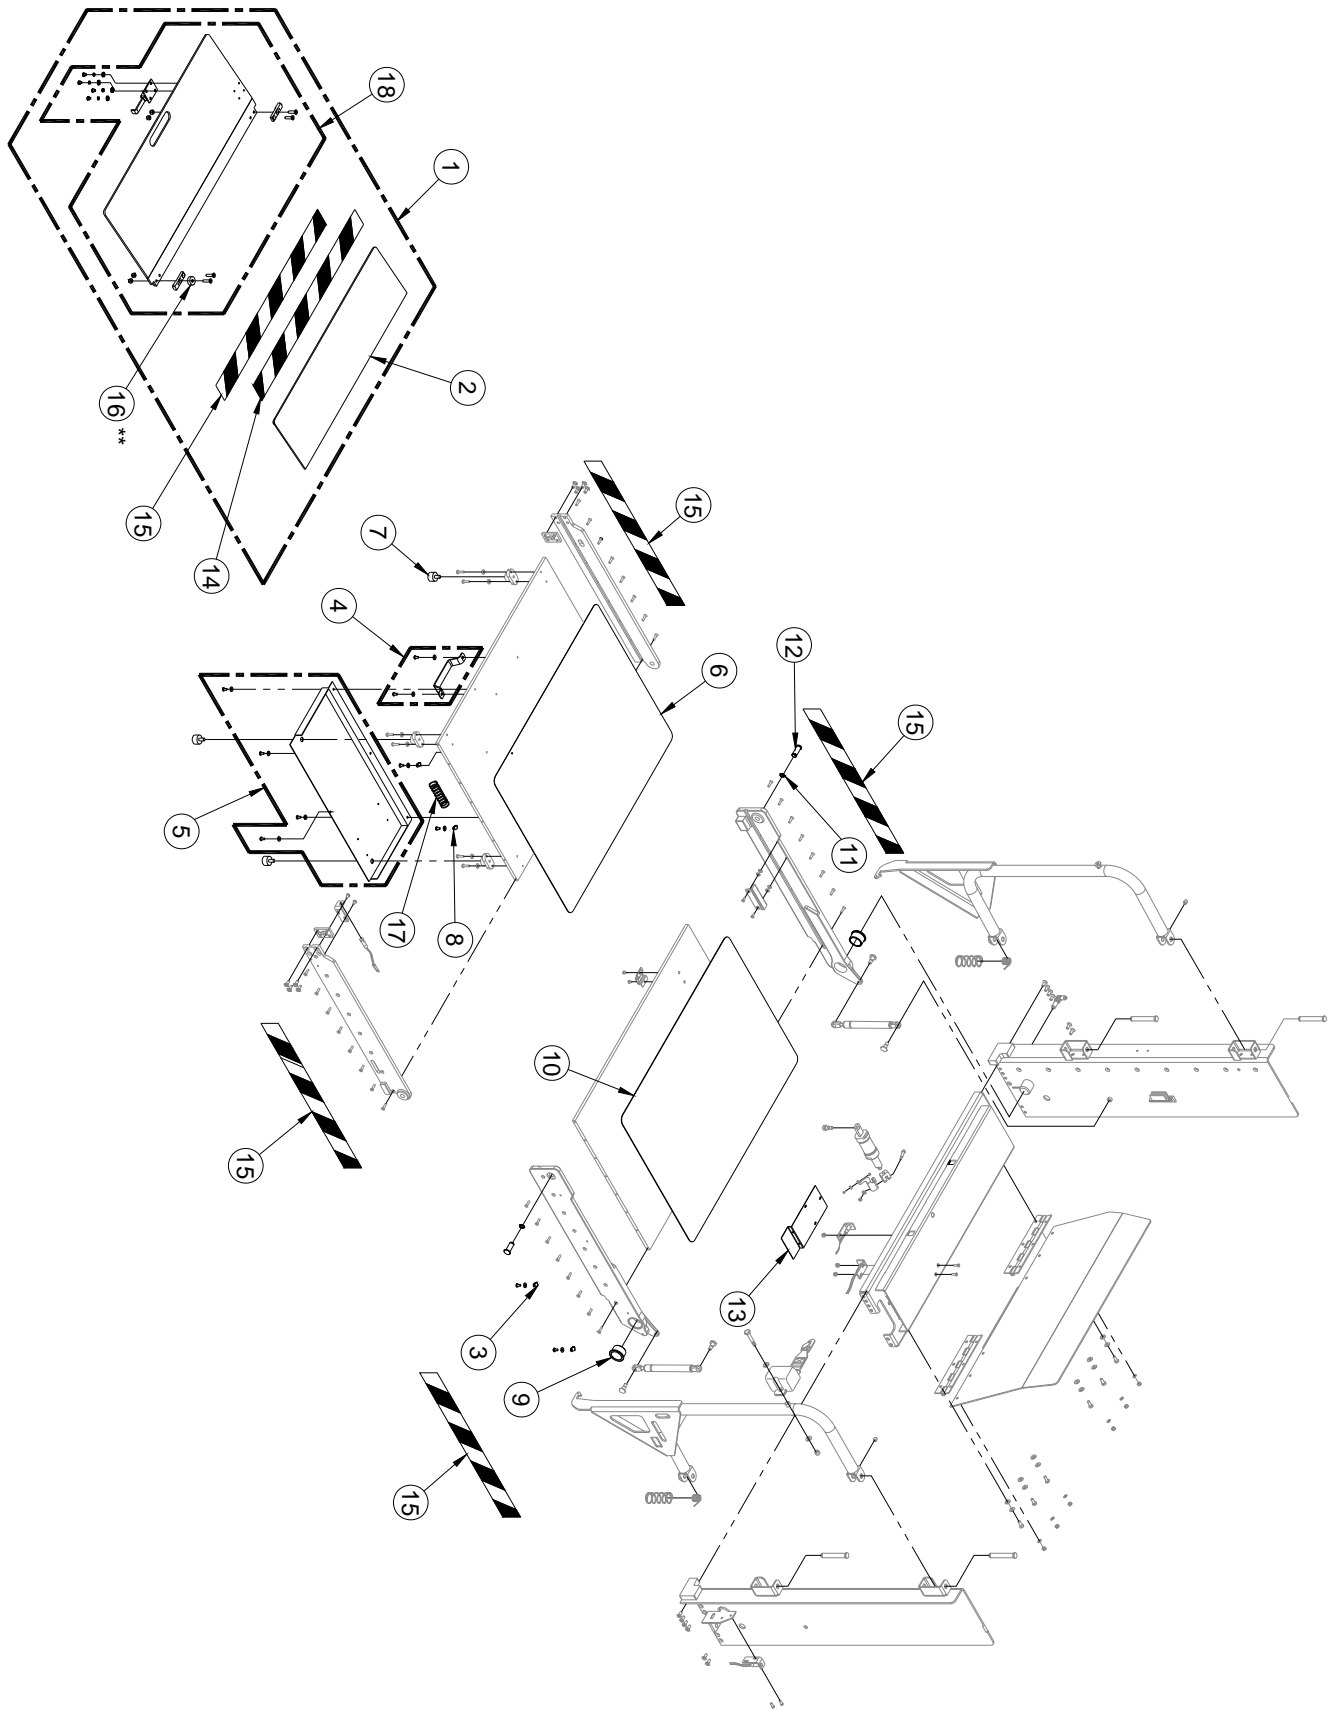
PLATFORM ASSEMBLY SHEET 1
